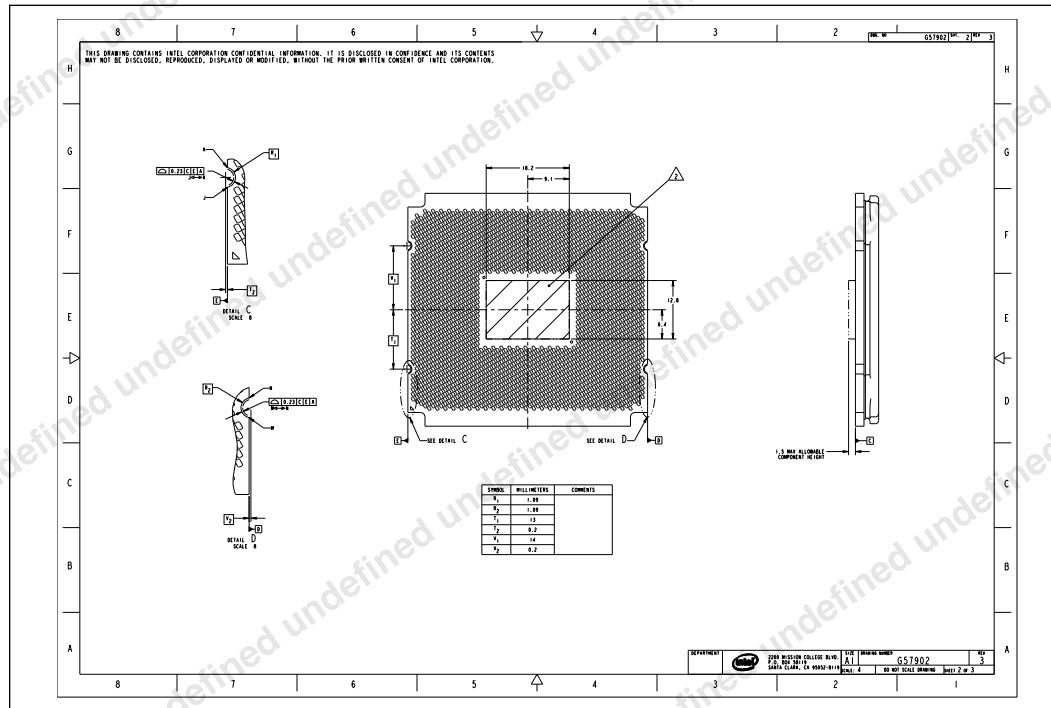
Intel® Xeon® Processor v3 Product Families Large Package Mechanical Drawing Page 1
